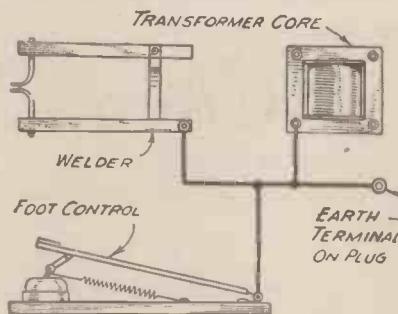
The connections for earthing the welder and the foot pedal
